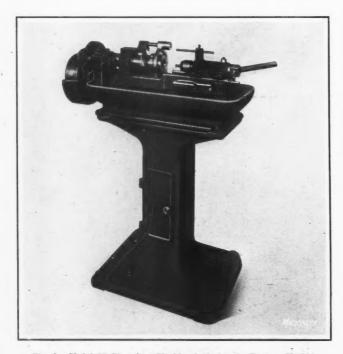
Model SS Threading Machine built by the Eastern Machine Screw Corporation
